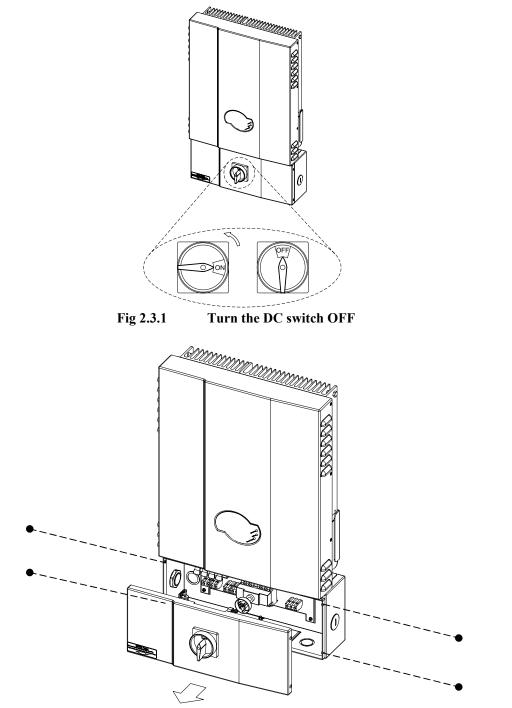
Remove the 4 screws on the wiring box Fig 2.3.3 remove the cover from the wiring box
